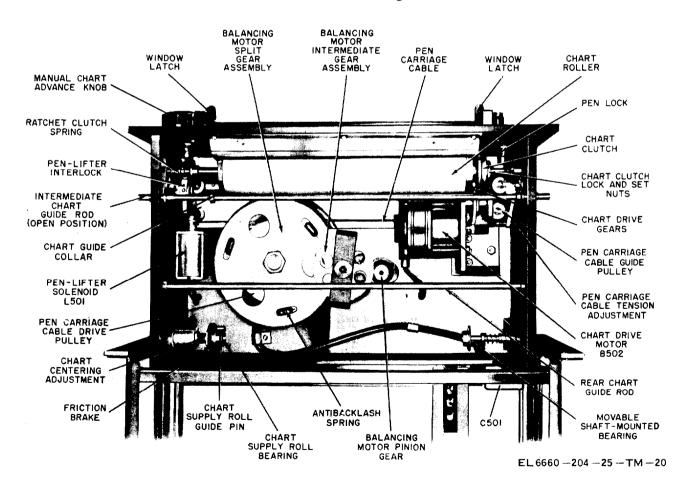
Frequency-time recorder, bottom view showing chart drive details.
